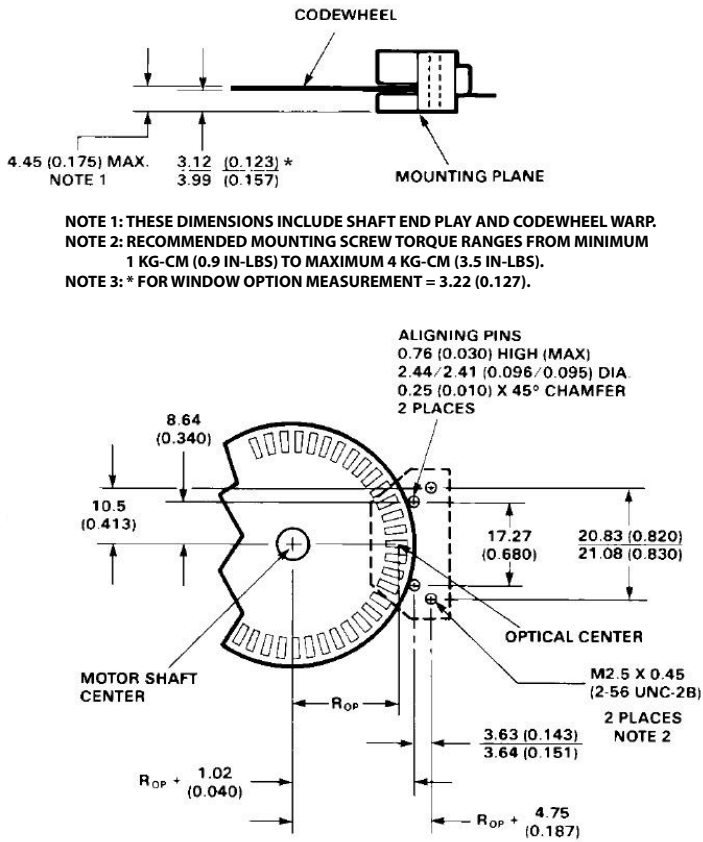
HEDS-6140 Code Wheel Used with the HEDS-9040
